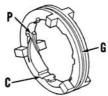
inspect shift ring pressure plate grooves (P) and pin contact grooves (C) for any signs of excessive wear. Width of circumferential groove (G) must measure 6.0-6.3 mm.
